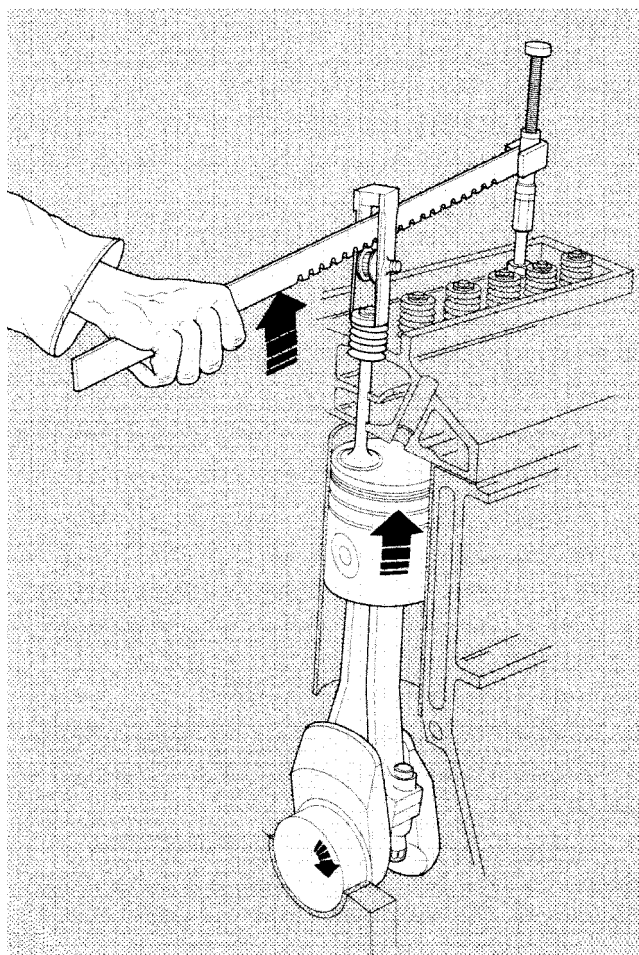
FIND TDC WITH THE VALVE SPRING COMPRESSOR
